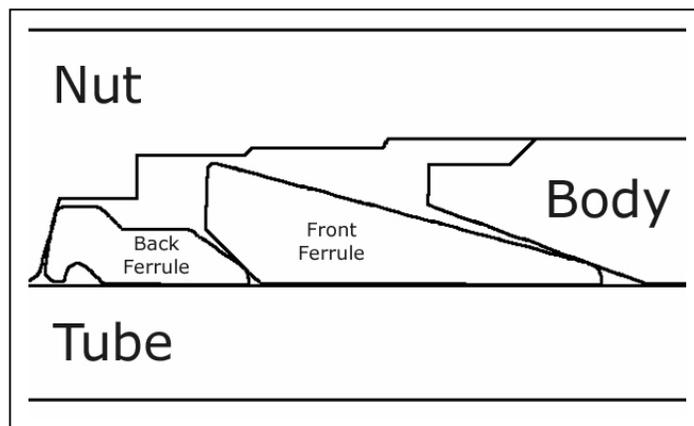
Internals of Swagelok SAF 2507 tube fitting before make-up. Fitting elements are shown in cross-section prior to make-up: the fitting nut (top), the new recess hinged back ferrule (left), front ferrule (center), and fitting body (right). The tube wall section is shown below.
